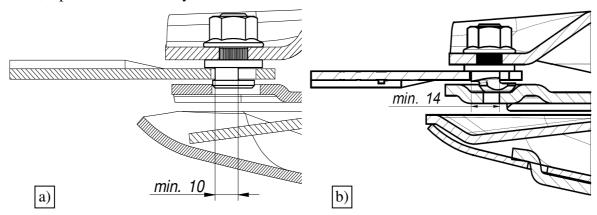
Permissible wear of knife holder pin on disk a) knife base M12 b) knife base M12 with claw
